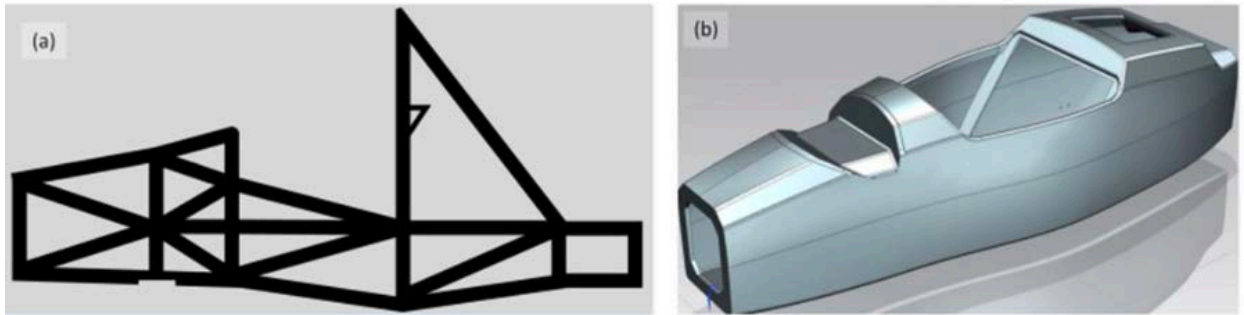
Two typical chassis designs: space frame (a) and monocoque (b) [5].
